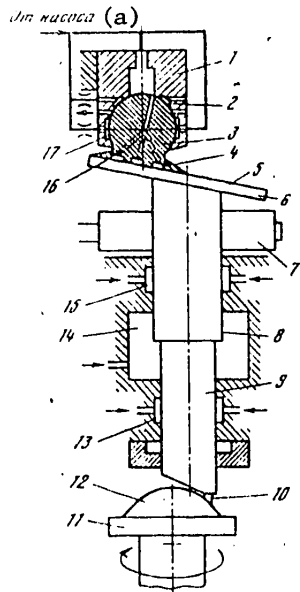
Diagram of the spindle assembly of a machine tool.
